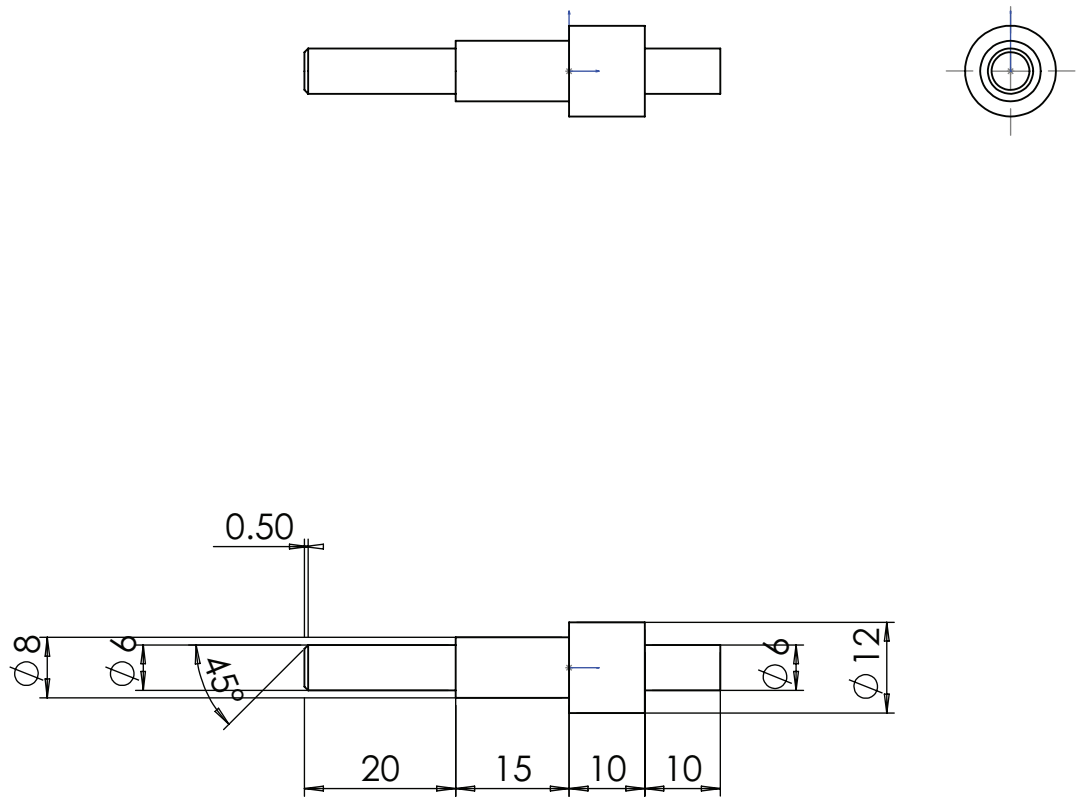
Axis 1 in the lens frame assembly of Fig.A.1.
